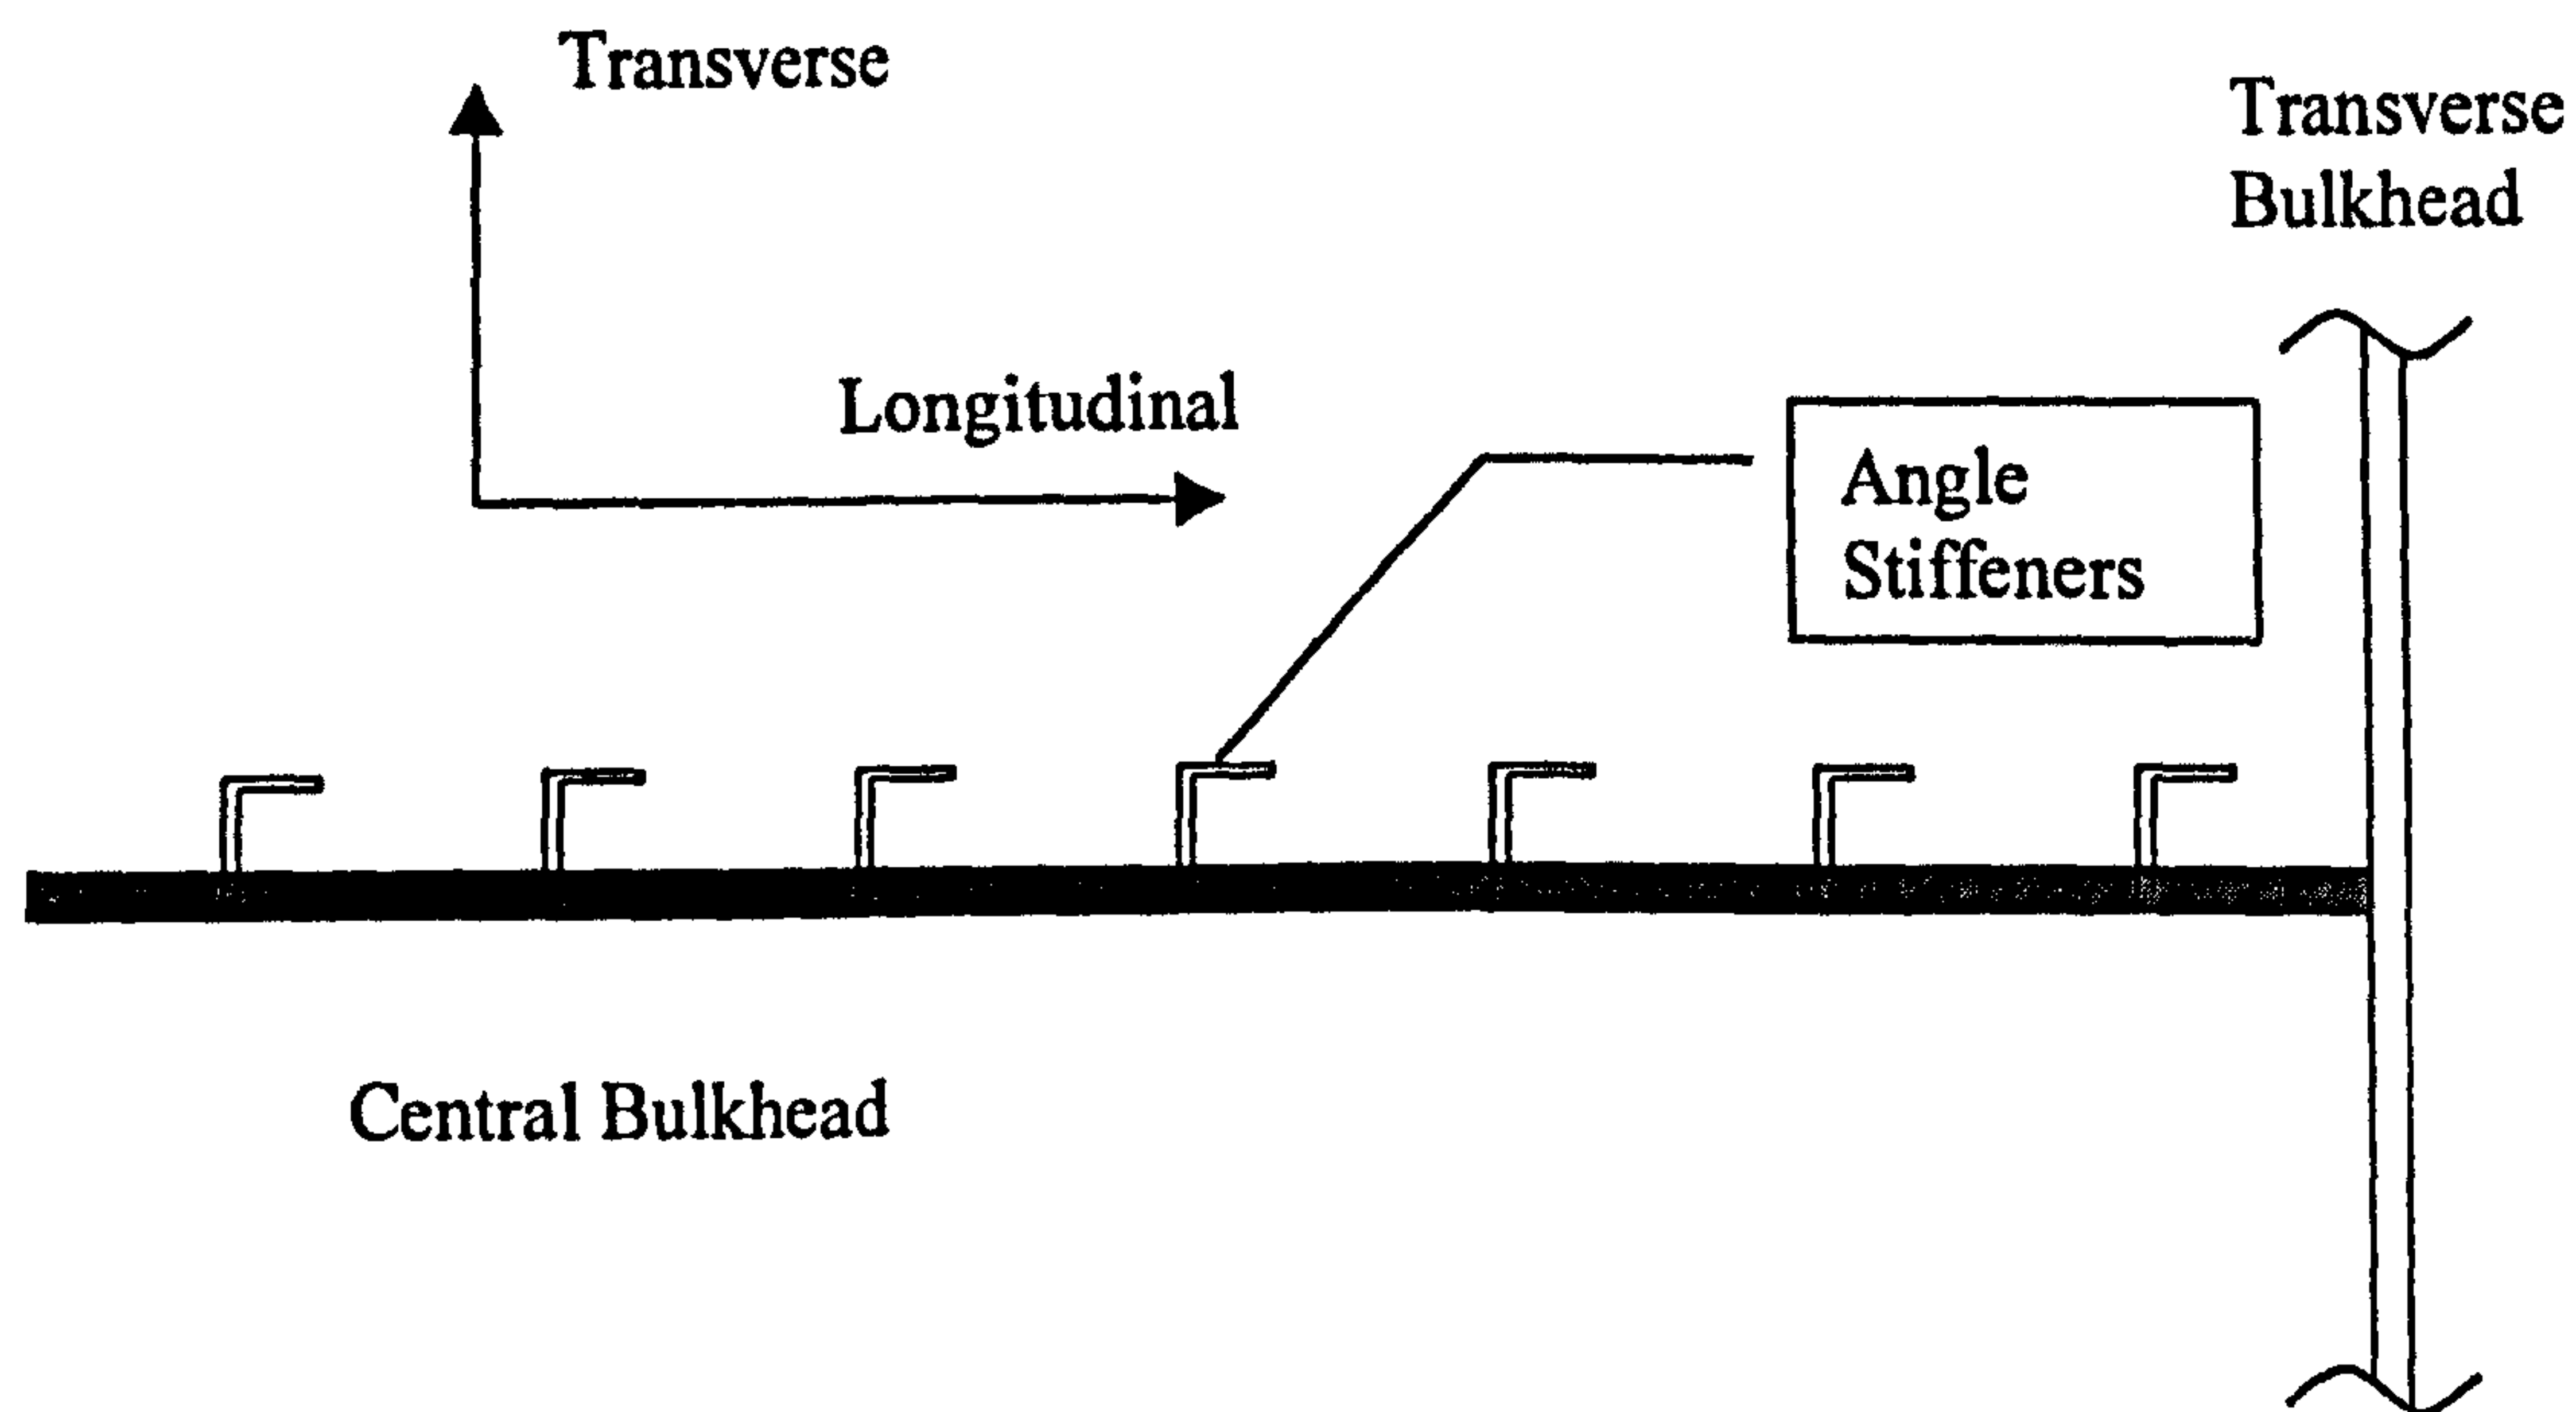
Plan views of stiffeners at centre bulkhead.
